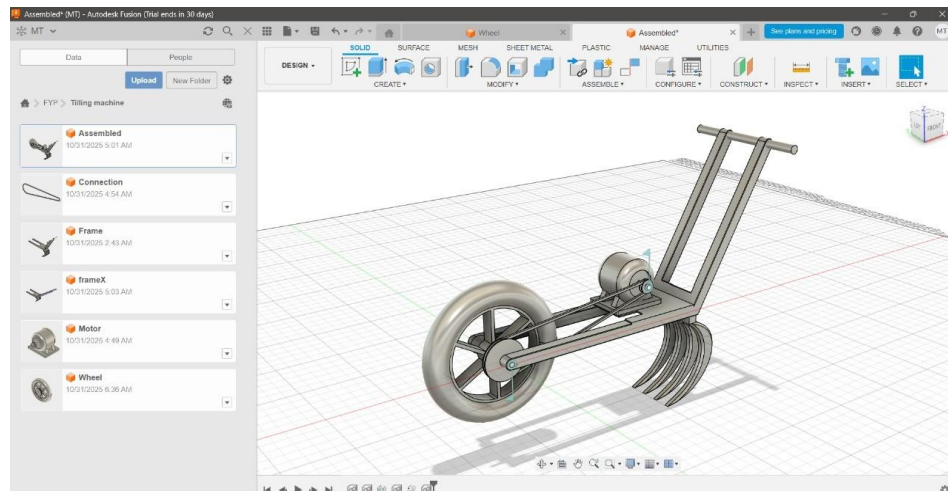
Isometric CAD model showing the complete assembly of the portable tilling machine.
